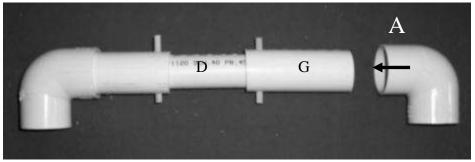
Assembly of the Medium/Large Wheelchair (Step 11).
